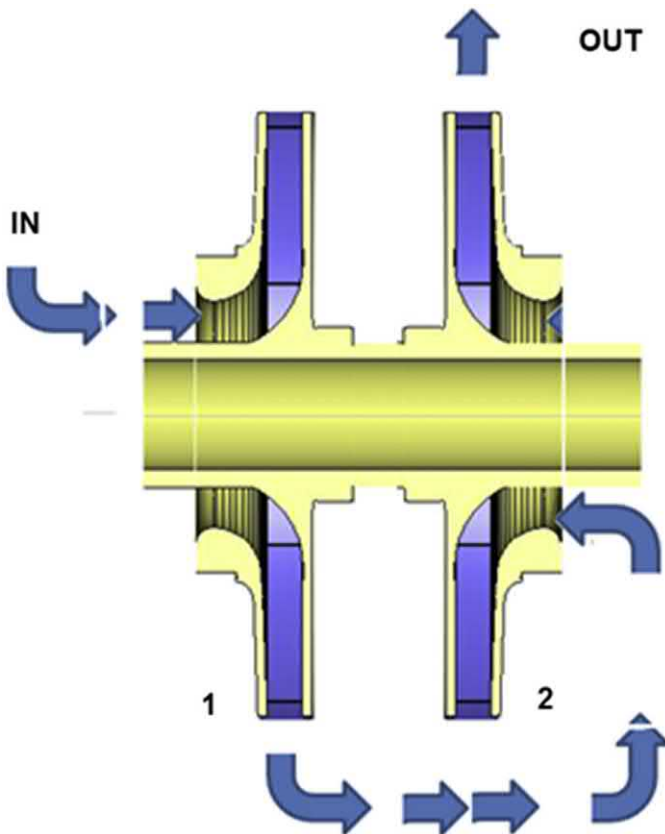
Two stage Back-to-Back impeller rotor.
